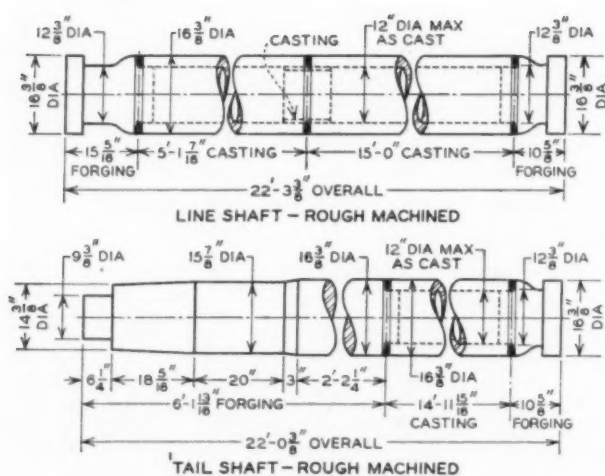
FABRICATED AND ROUGH-MACHINED LINE- AND TAIL-SHAFT SECTIONS
